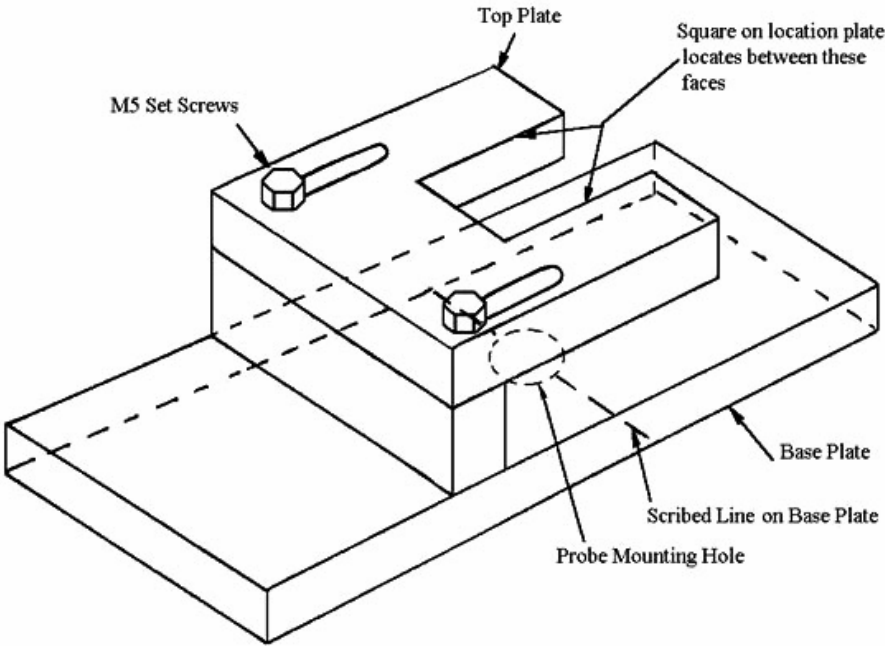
Jig for Setting BR WSP Probe to Drawing NSE-A1-8370379
